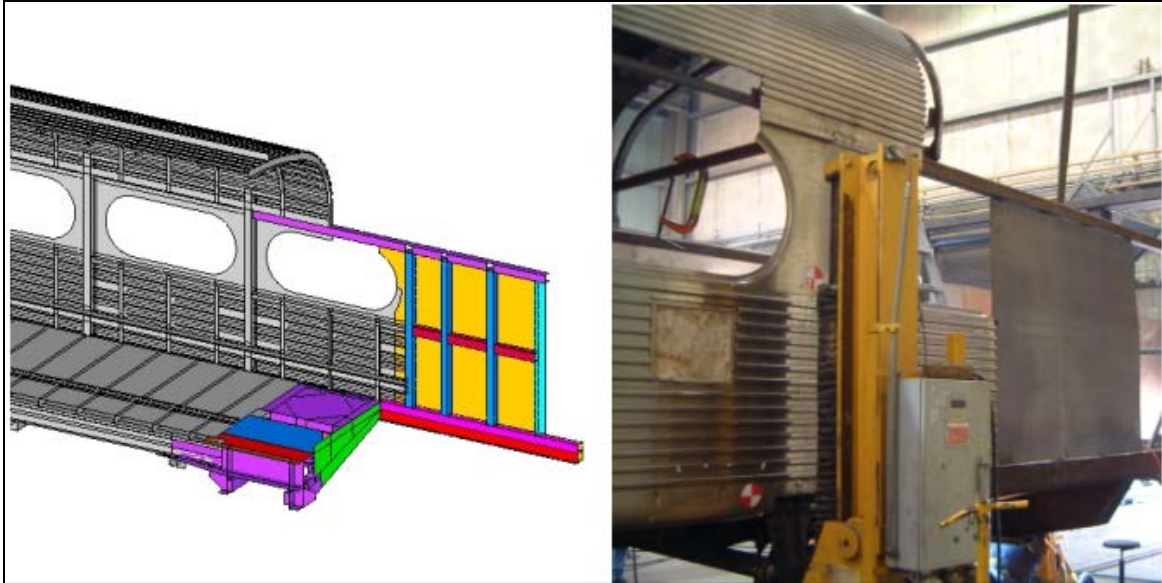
Reinforcing the Existing Side Sills and Extending the Cant/Roof Rails
